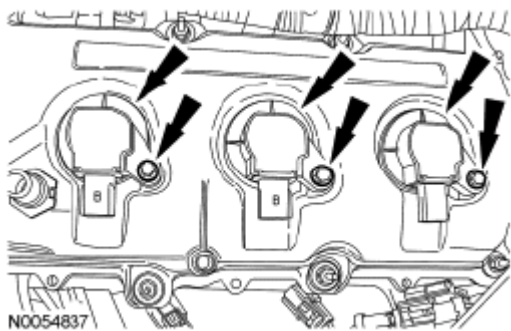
Locating Bolts And Coil-On-Plug Assemblies
